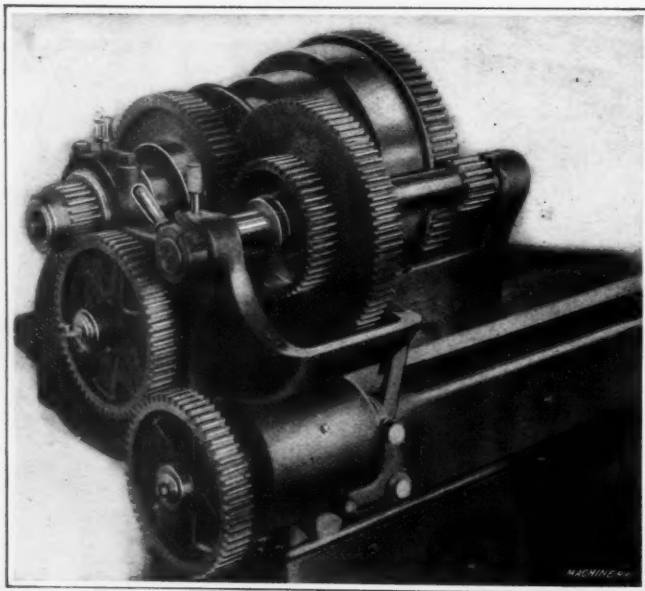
Close View of Head and Gear-box with Gear Guards removed
